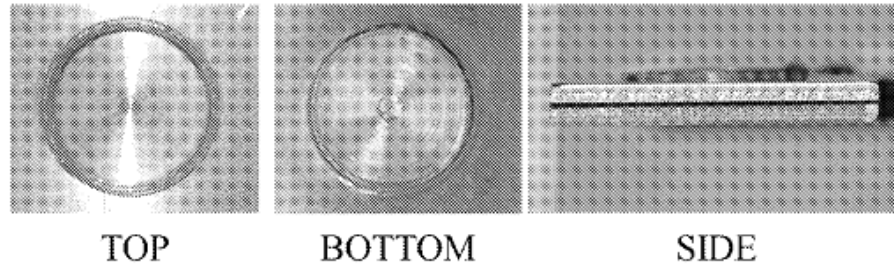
Double Sided FSSW device. This device contains the bottom FSSW tool, provides rotation and rigidly clamps the sample during welding.
